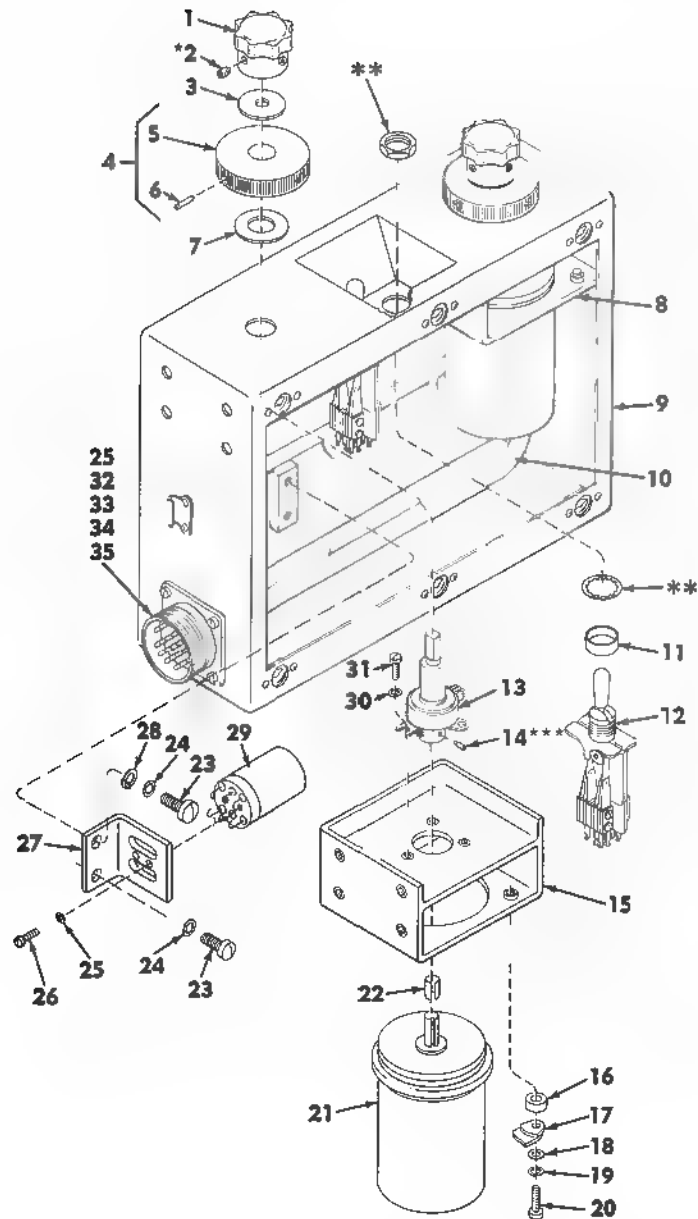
FRAME, FILTER /9000044/ EXPLODED VIEW
